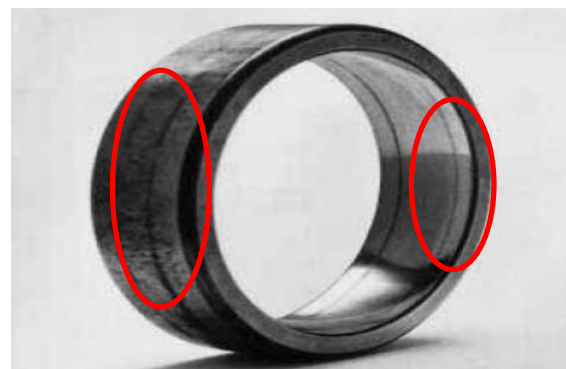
Outer ring of a ball bearing which has been driven too far up its taper seating.
